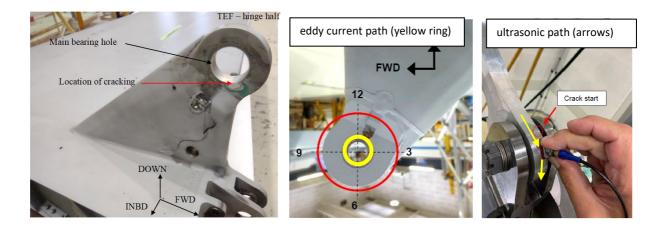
left: Inboard TEF hinge lug crack location, middle: ET inspection, right: ultrasonic inspection.
